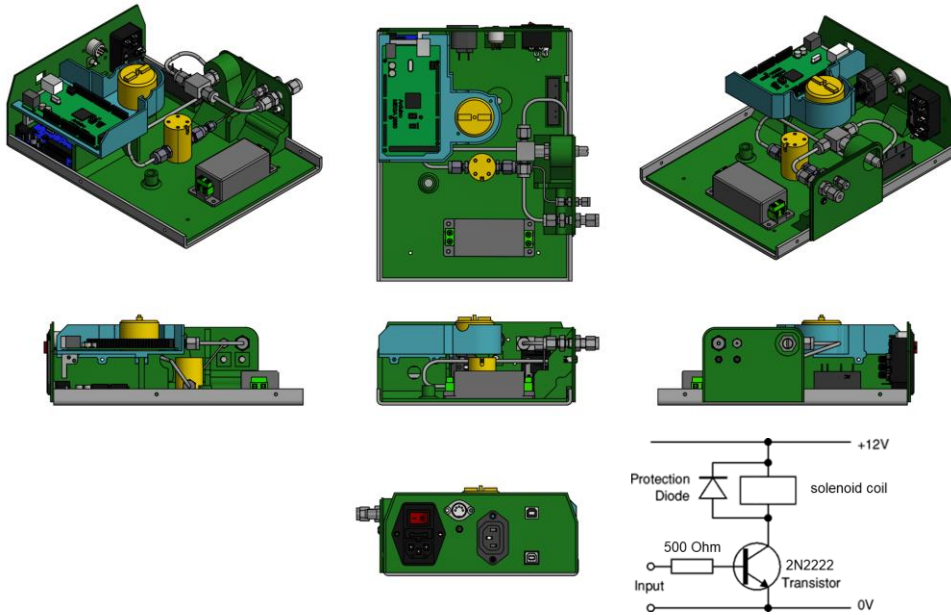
CAD views of the back plate assembly and the schematic to control the 12V solenoid coil with a 5V digital signal.
